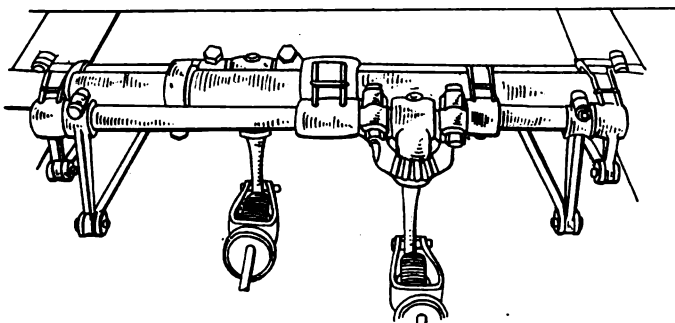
A TRUCK-BRAKE CONTROL EQUIPPED WITH A DIFFERENTIAL EQUALIZER
